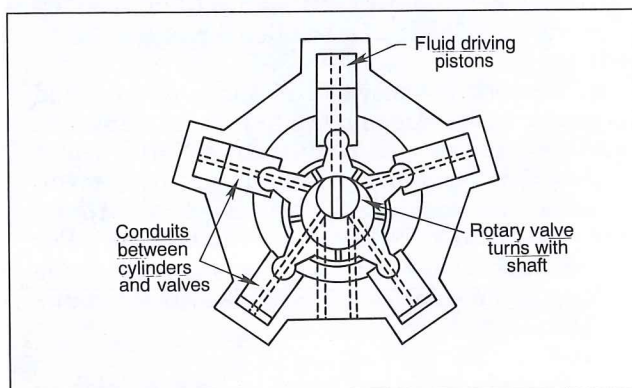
Reciprocating pistons cause shaft rotation in radial-piston motors.
